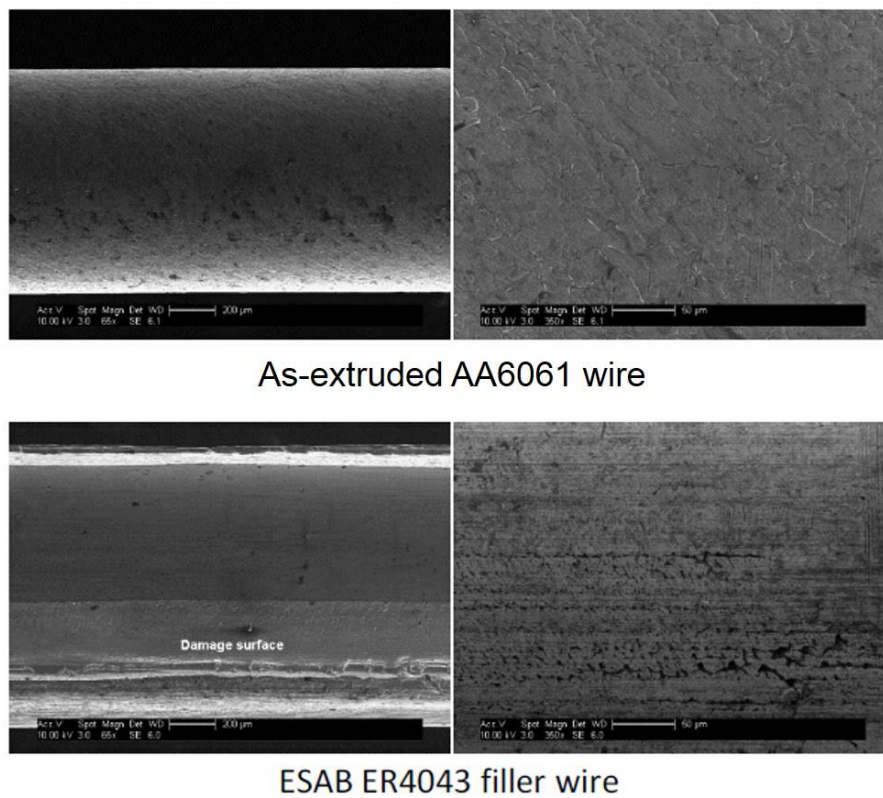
Surface condition of 6061 extruded wire and commercial weld filler wire under SEM
